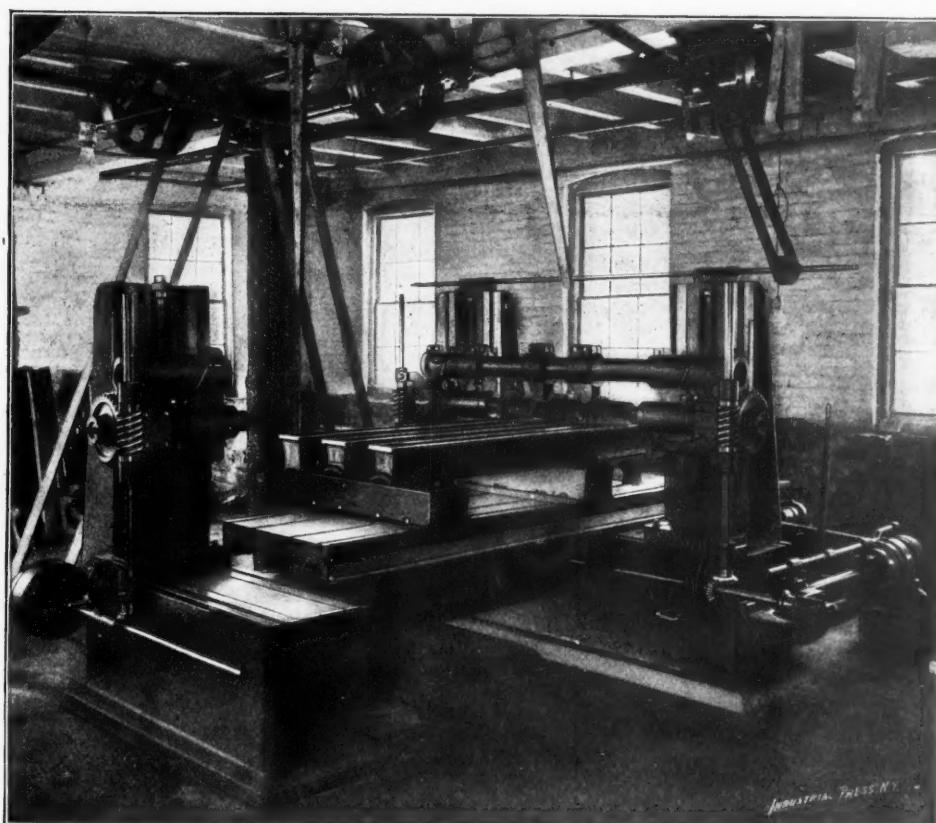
Milling and Boring Machine arranged for Milling Lathe Beds.
